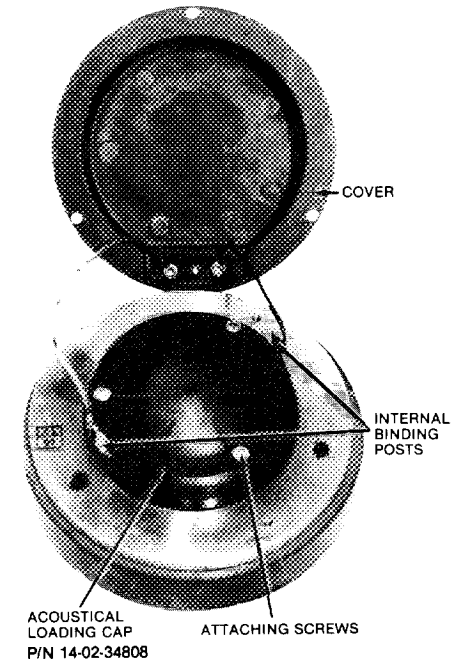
900 Type Diaphragm in Place, with Loading Cap
